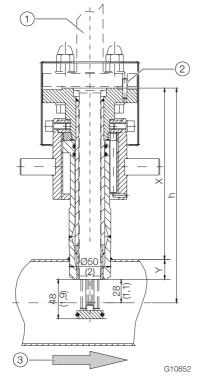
Integrated changing device in measurement position, dimensions in mm (inch)
